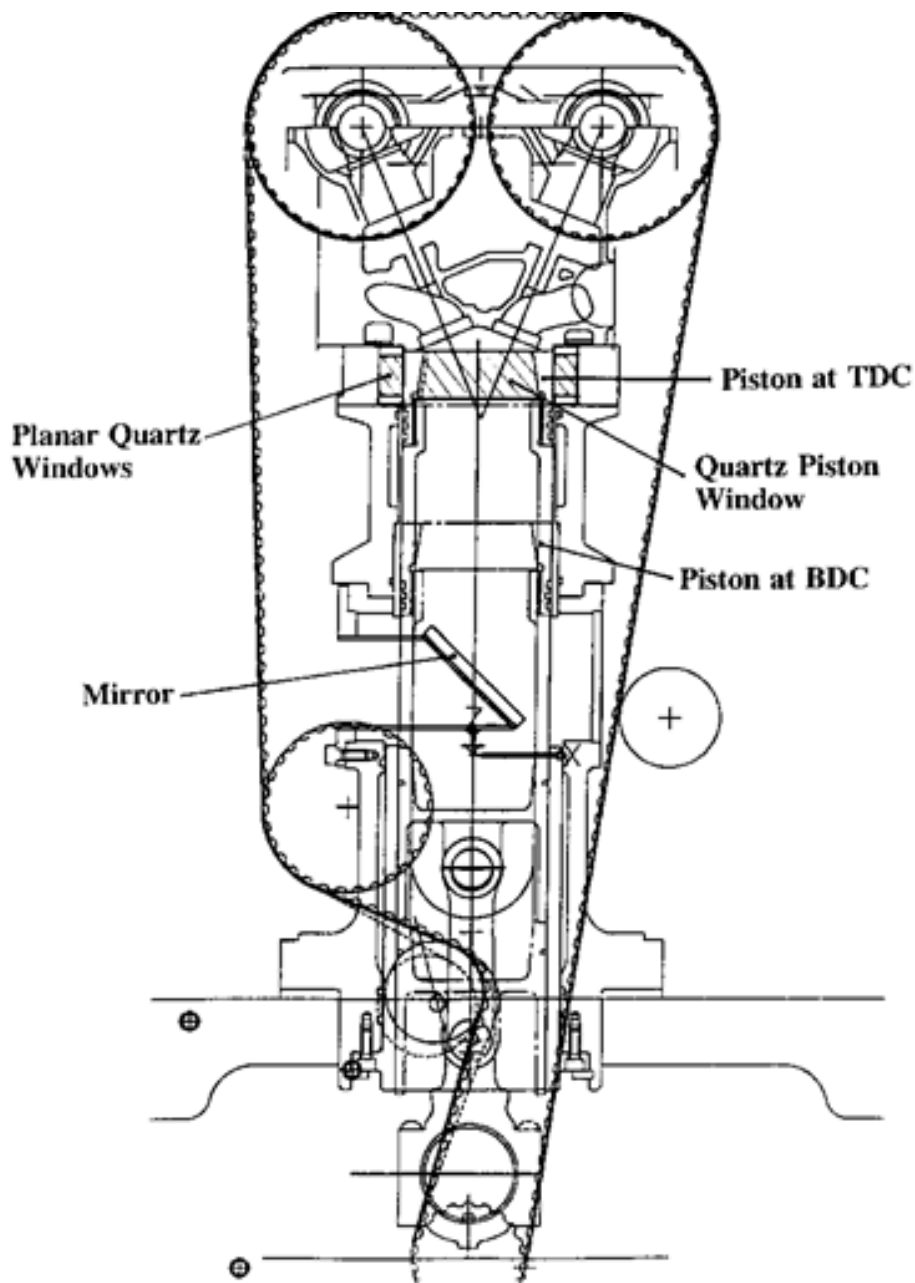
A schematic of the Bowditch design [38]. A hollow extension rod connects two pistons, through which a 45° mirror is placed to provide a view of the combustion chamber from below. The upper piston moves inside the combustion cylinder, while the lower piston links to the crankshaft with no cylinder liner installed. This figure was kindly provided by Prof. Richard Stone.
